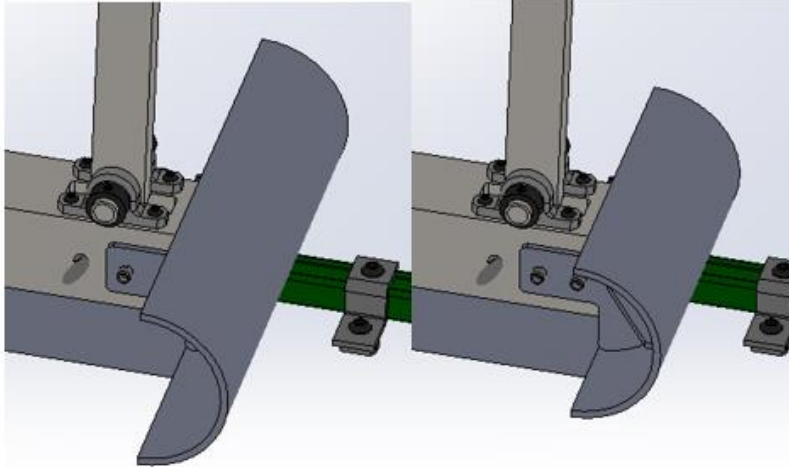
Movement of Custom Bushing Housings Along Horizontal Pipes of Frame
